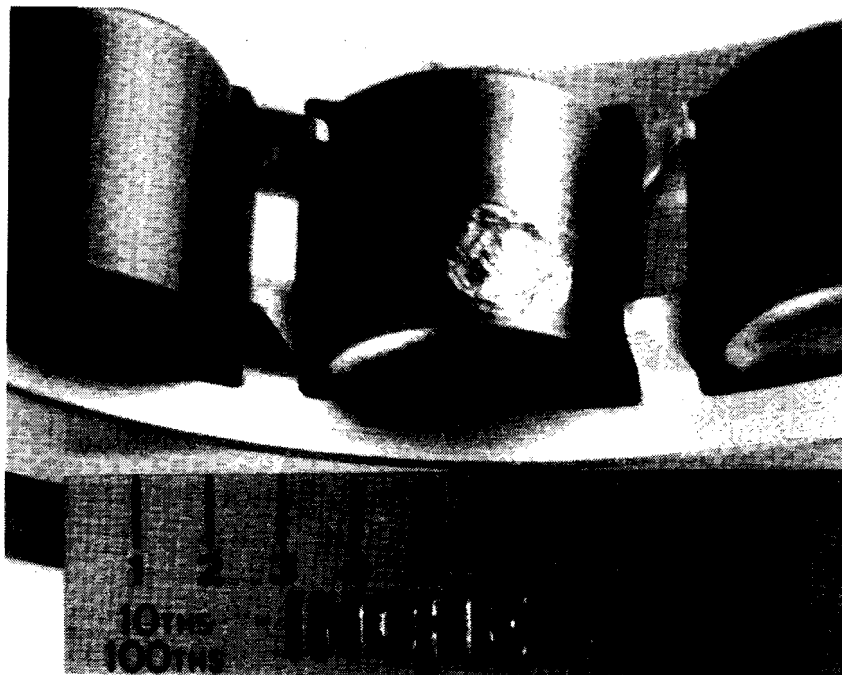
42-Degree Gearbox -210 Bearing Roller Fault C/D,
